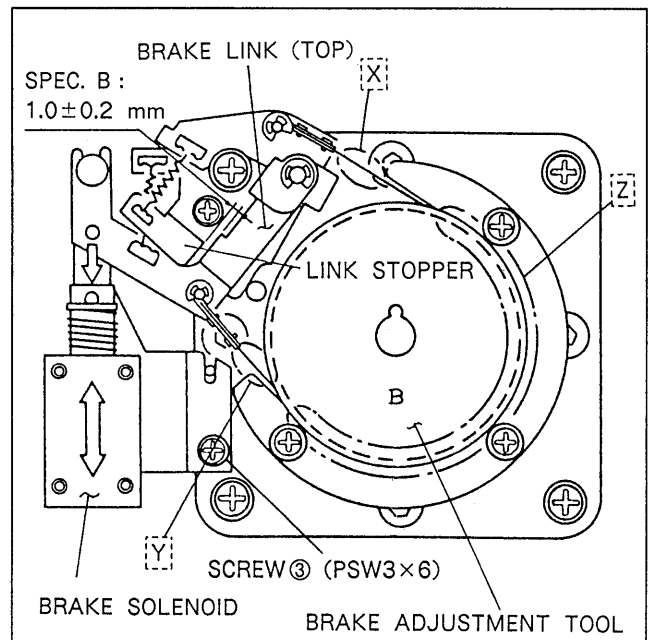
Link Stopper/Brake Solenoid Position Adjustment
